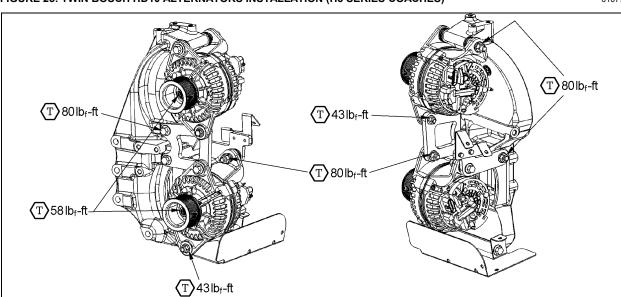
TWIN BOSCH HD10 ALTERNATORS AND ACCESSORIES MOUNTING TORQUES (H3 SERIES COACHES)
